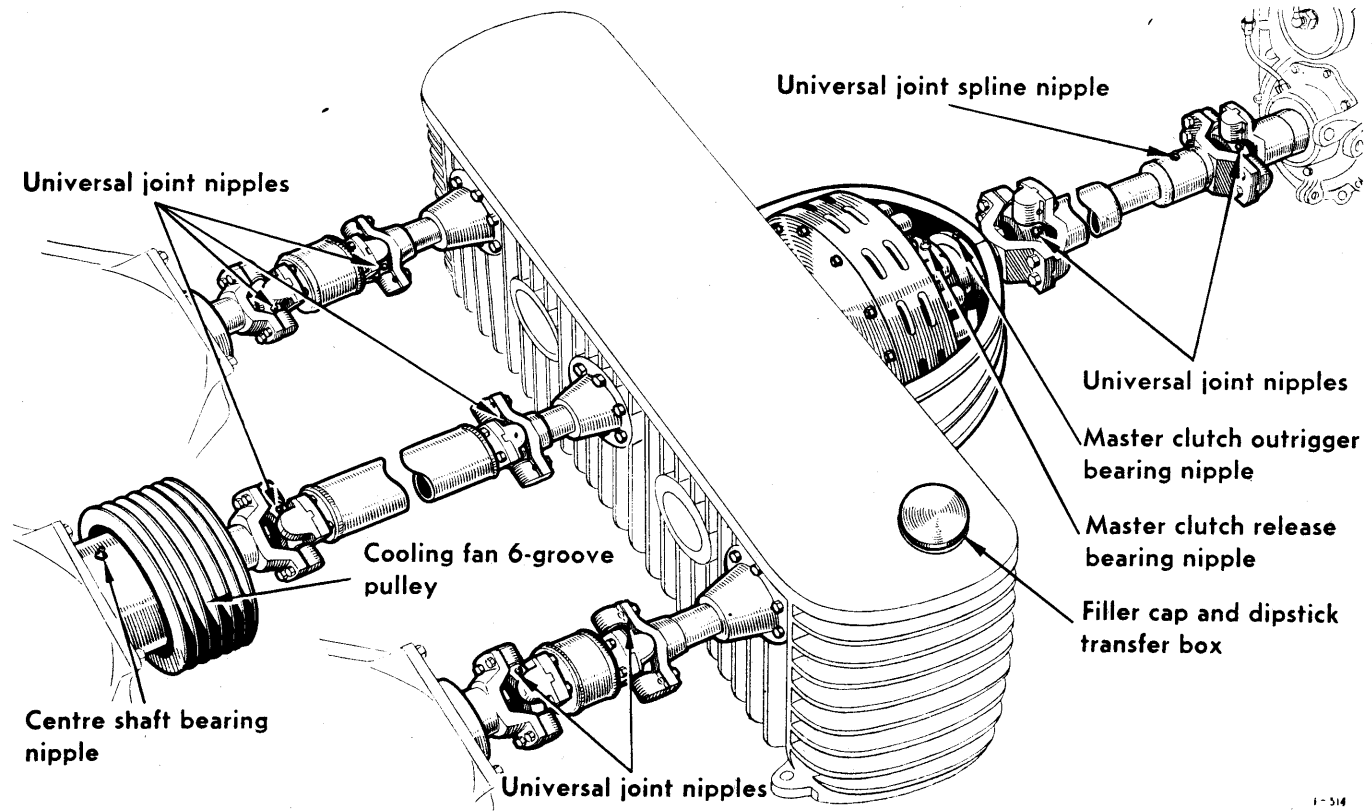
Universal Joints and Master Clutch Lubrication Points
